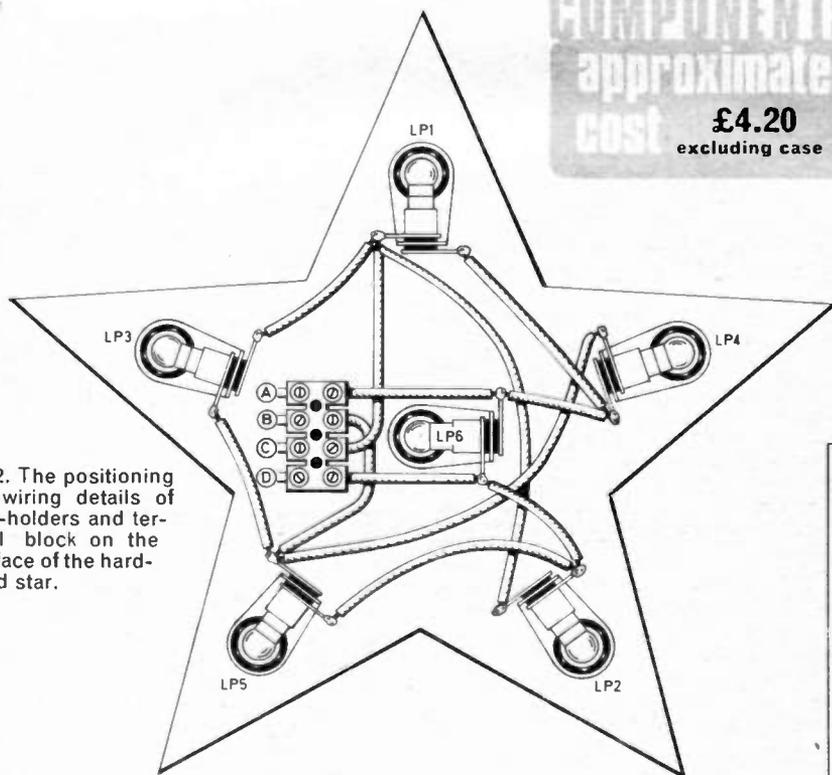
The positioning and wiring details of lamp-holders and terminal block on the rear face of the hard-board star.
